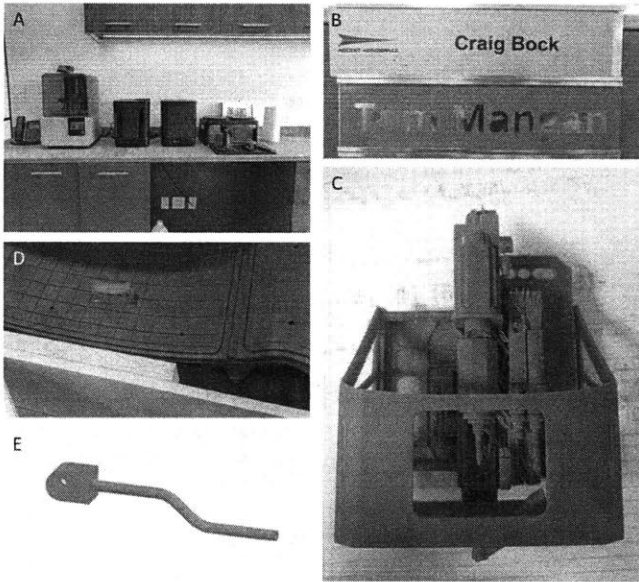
Journey to the first AM production part. (A) Printer with free access, (B) Early experiments, (C) Intricate and relevant demonstration part, (D) User generated vanity projects testing the limits, (E) Prototype water tube that became a production part [photos by author].
